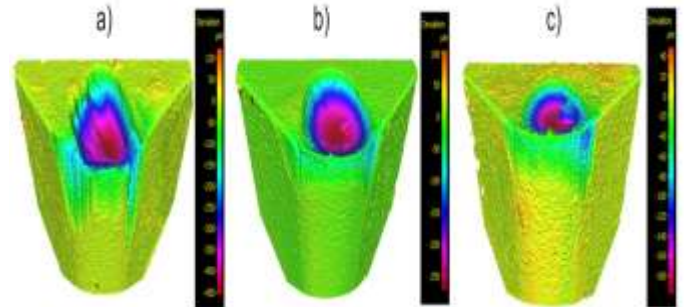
Topography of the cutting tool wear areas depending on the method of cooling: a) dry cutting; b) MQCL; c) MQCL + EP/AW [R. W. Maruda, 2016].
